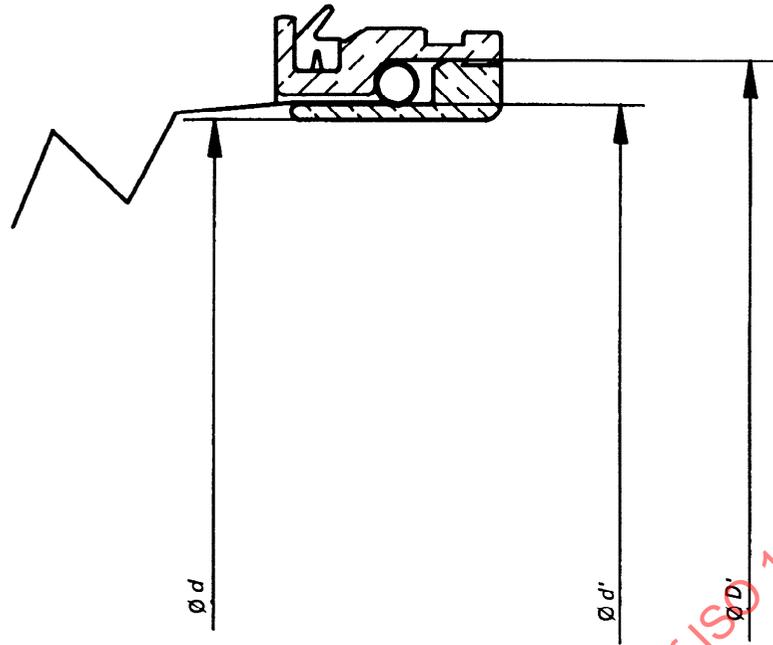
Dimensions and detail of fitting remote-handling tong gaiters of type 2 on type 2 ejection support rings
